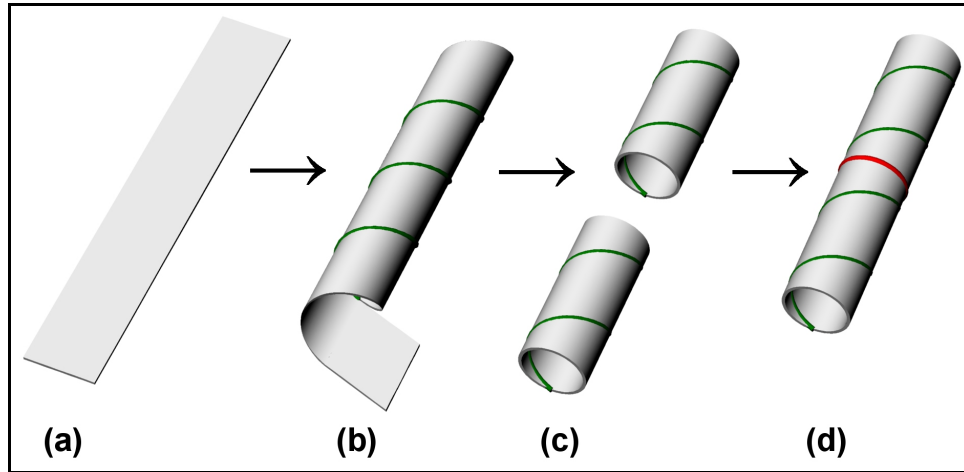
Schematics of Spiral-Welded Pipeline Fabrication Steps
